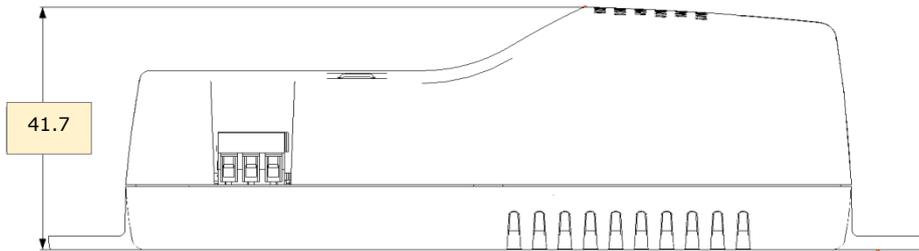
LDSBus Trailing Edge Light Dimmer Dimension – Side View
